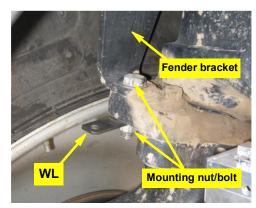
WAS link rod bracket installed on fender bracket nut/bolt
